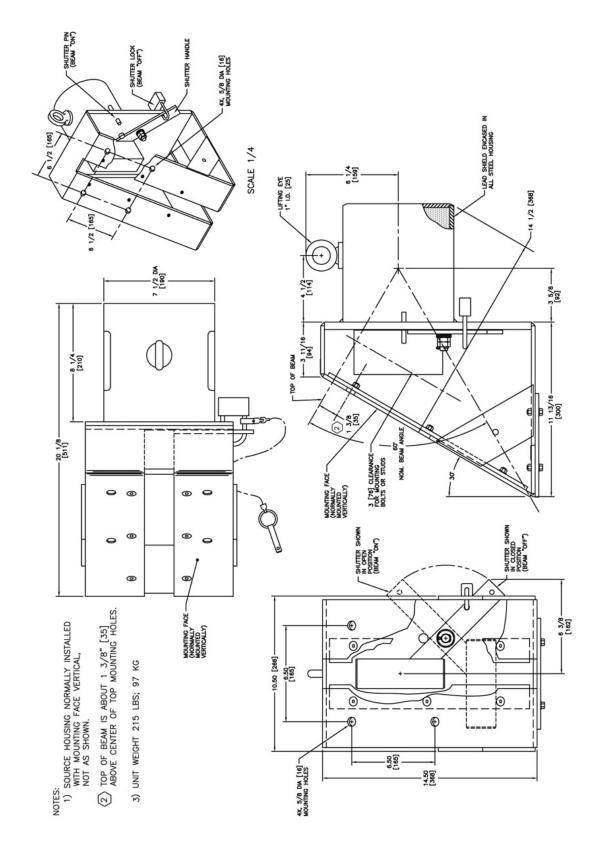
868631: Mounting dimensions – Model 5208B source housing (sheet 1 of 1)
